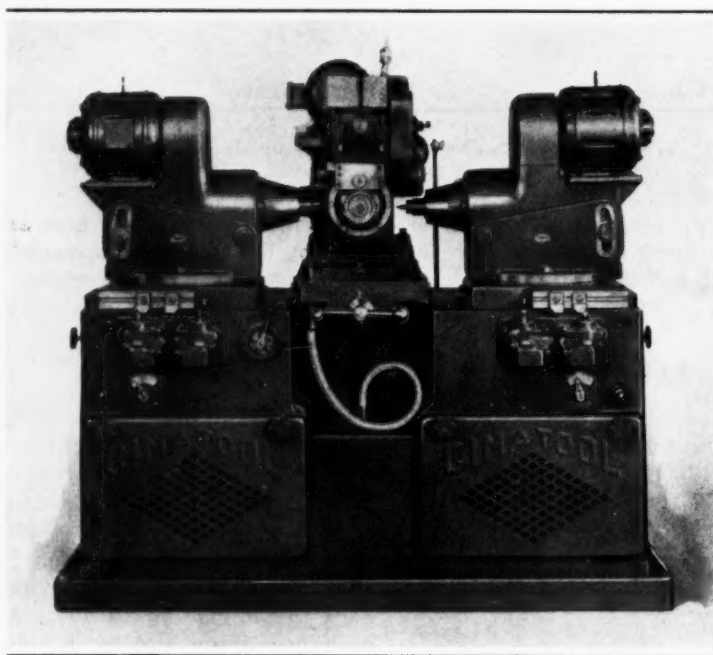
Peerless Hydraulic Gear-tooth Chamfering Machine of Two-spindle Design
